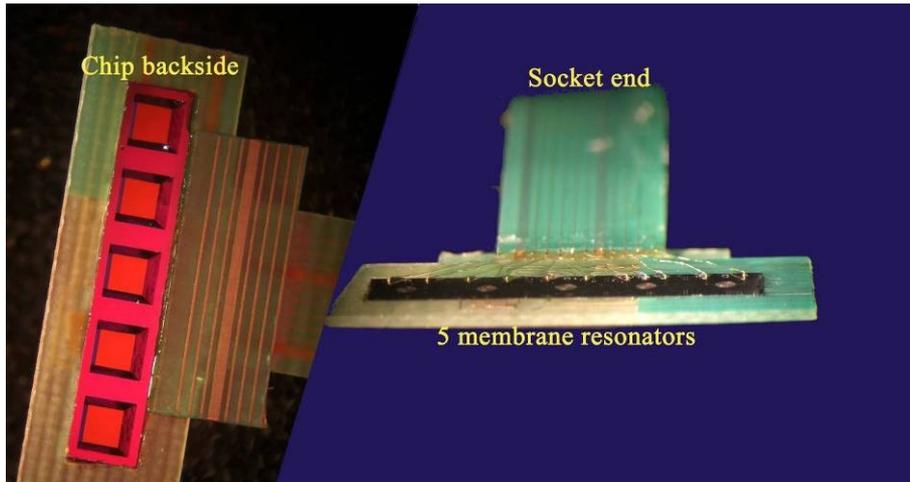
Final design of PCB package for testing of Sonitor phased array microphone
